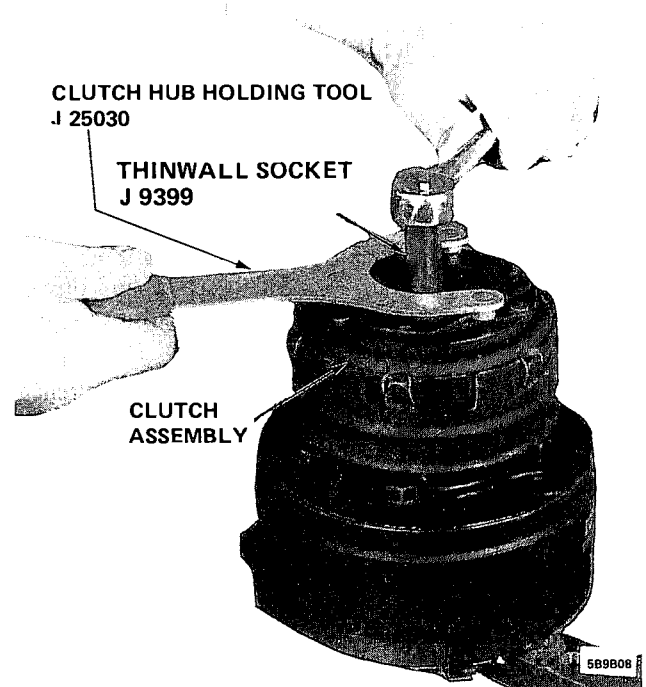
B-31 - Removing Shaft Nut - 4 Cylinder Compressor
